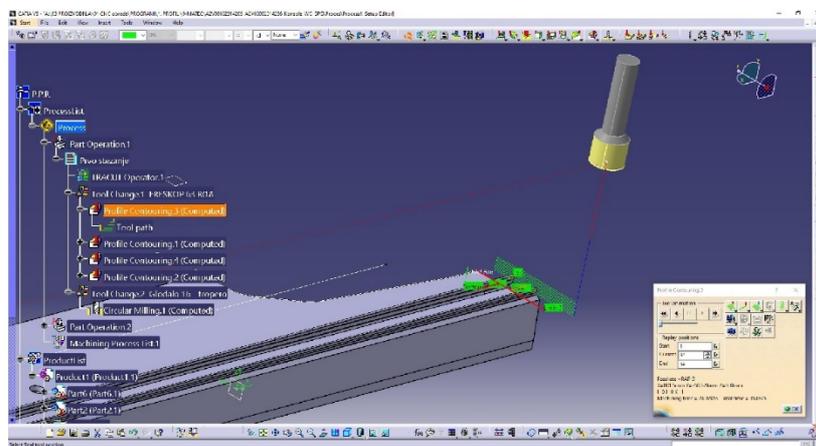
Example of CAM software used for simulation and coding in realization of the machining process.
